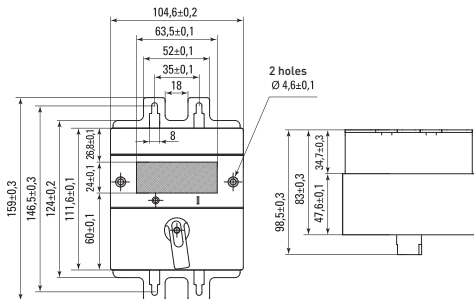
Overall dimensions of motor mechanism VA-99M 250
